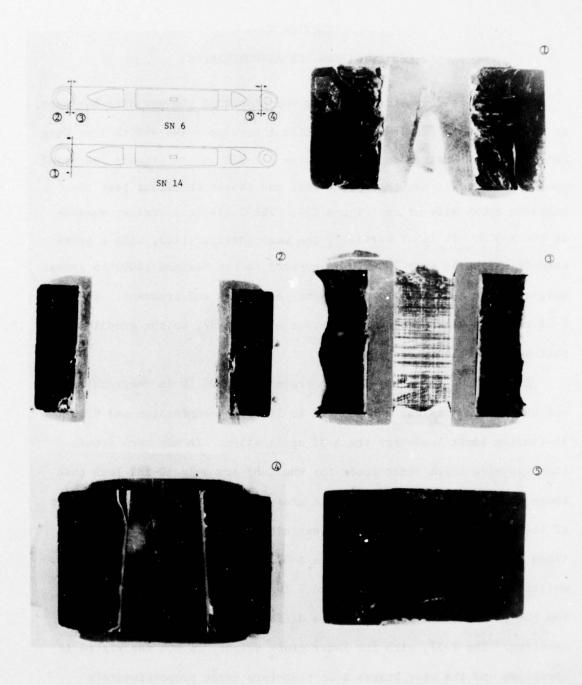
Sectioned Views of Defective Side Braces Showing Voids, Lack of Fiber, and Some Fracture Damage from Static Tests
